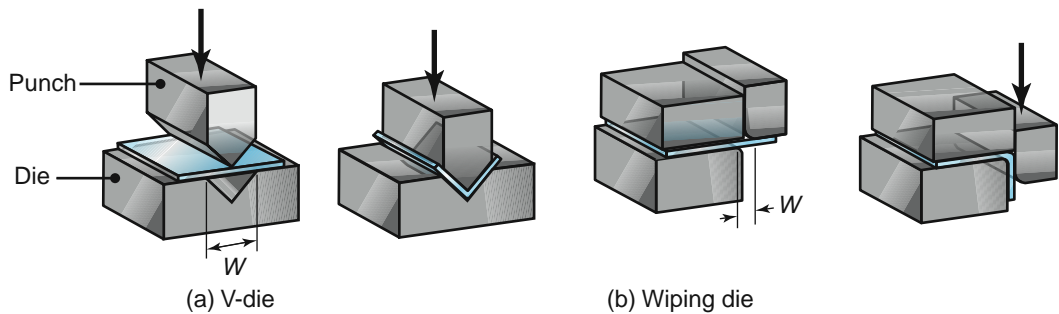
Common die-bending operations showing the die-opening dimension, W , used in calculating bending forces.
